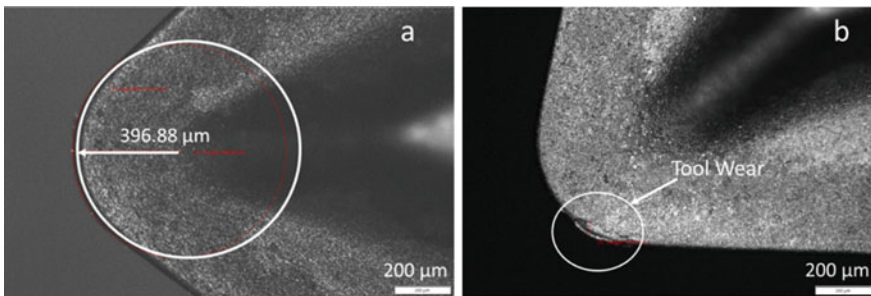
Cutting insert tool tip, a before machining, b after machining
